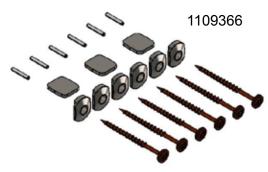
Mounting kit, switch system with telescope bracket in concrete
